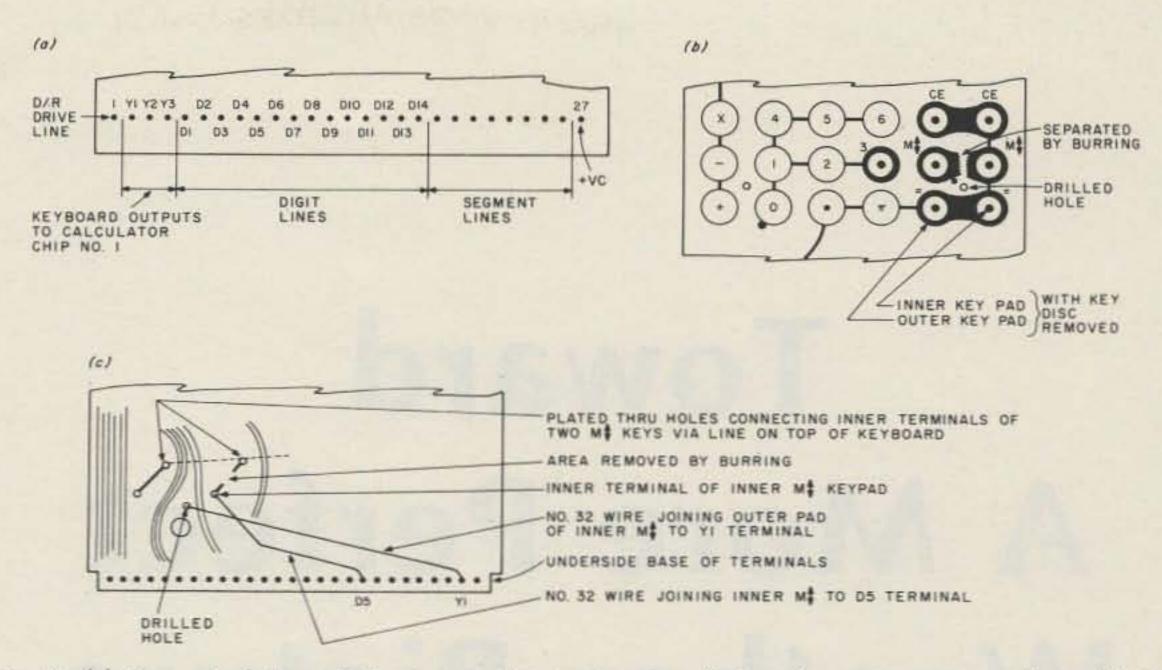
(a) Expanded view of the terminal strip showing digit and segment output lines. (b) A section of the top of the keyboard showing where the key discs have been removed, where the hole is drilled, and where the outer pads of the M<sup>\$</sup> keys have been separated by burring. (c) Bottom view of the keyboard showing the modifications.
